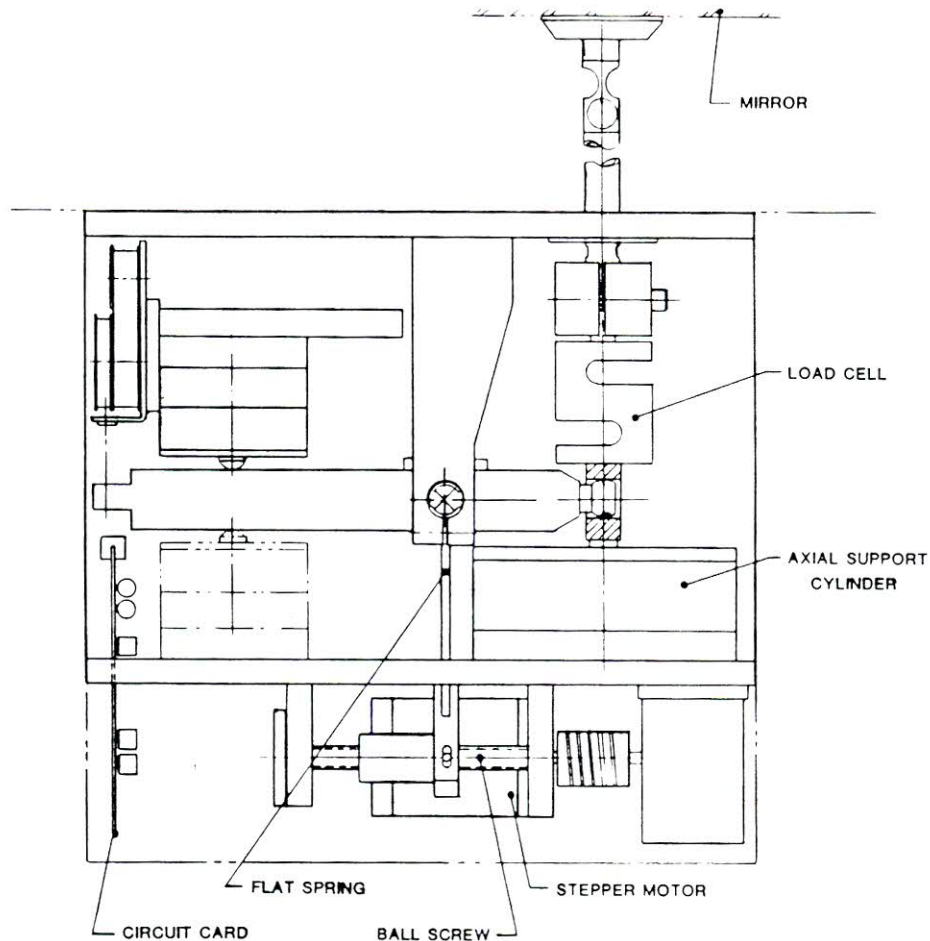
A diagram of one of the axial support/active optics mechanisms. The active force is produced by bending the flat spring, which couples to the mirror through a lever.
